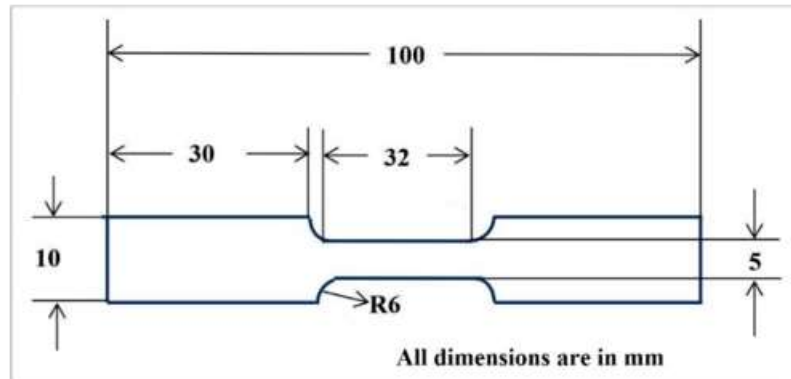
Tensile test specimen dimensions as per ASTM E8
